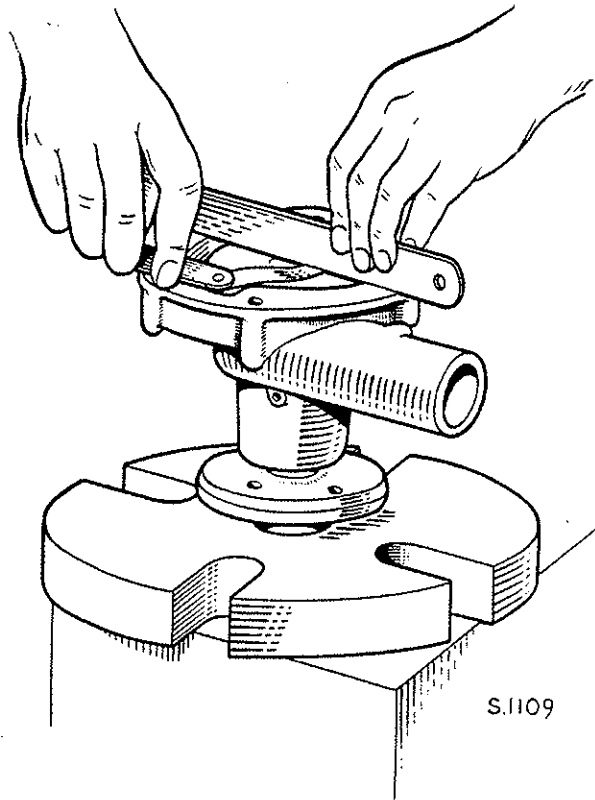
Checking the clearance of the impeller below the rear face of the pump body
